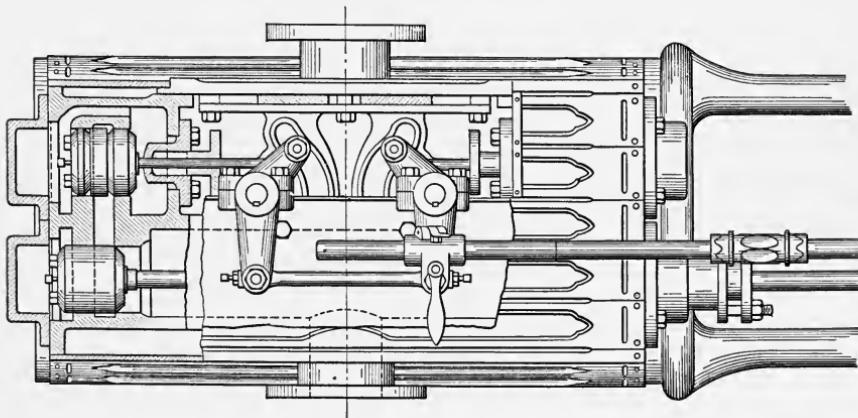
Valve Mechanism of the Fitchburg Engine.
